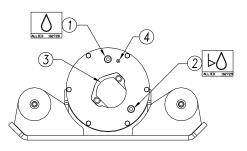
1-Oil Fill Plug, 2-Oil Check Plug, 3-Motor, 4-Pressure Relief Plug
